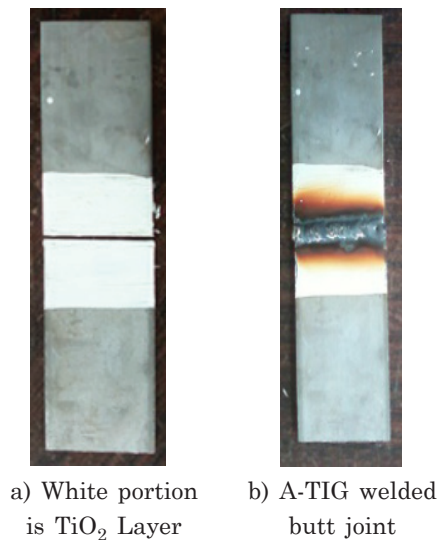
The Use of TiO₂ flux for A-TIG welding [47]
